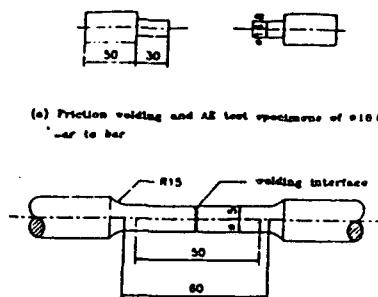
ø16.8 bar-to-bar specimen for manufacturing ø16 special valve spool
